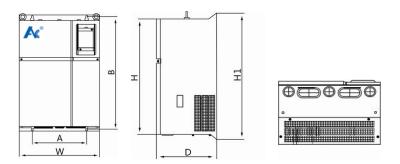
Physical appearance and overall dimensions of AC900 (sheet metal housing)
